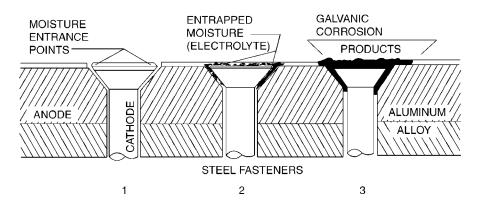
Galvanic Corrosion Adjacent To Steel Fasteners
